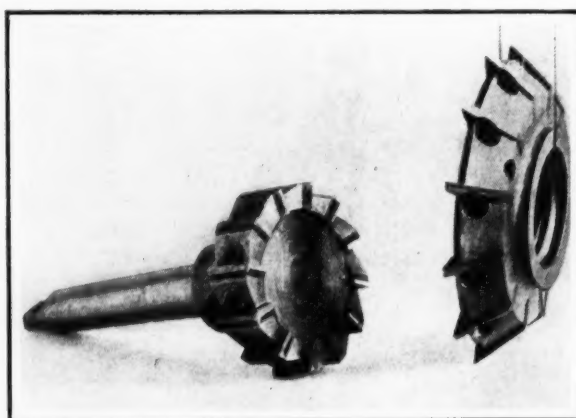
Early Design of Brown & Sharpe Inserted-tooth Milling Cutters, Illustrated and Described in November, 1895
